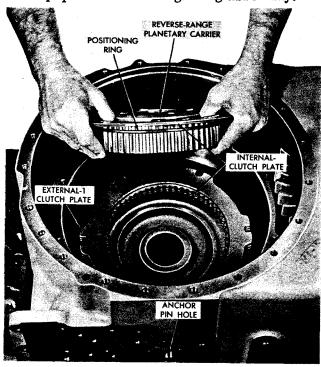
Installing reverse-range planetary carrier and clutch plates
